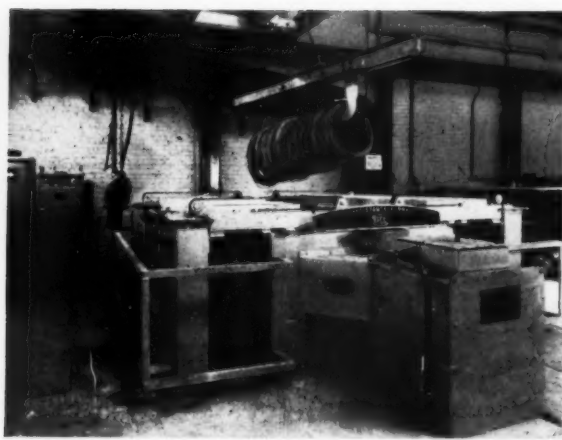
Electrically heated rod baking furnace with EFCO-Lindberg Cyclone external air heater units.
